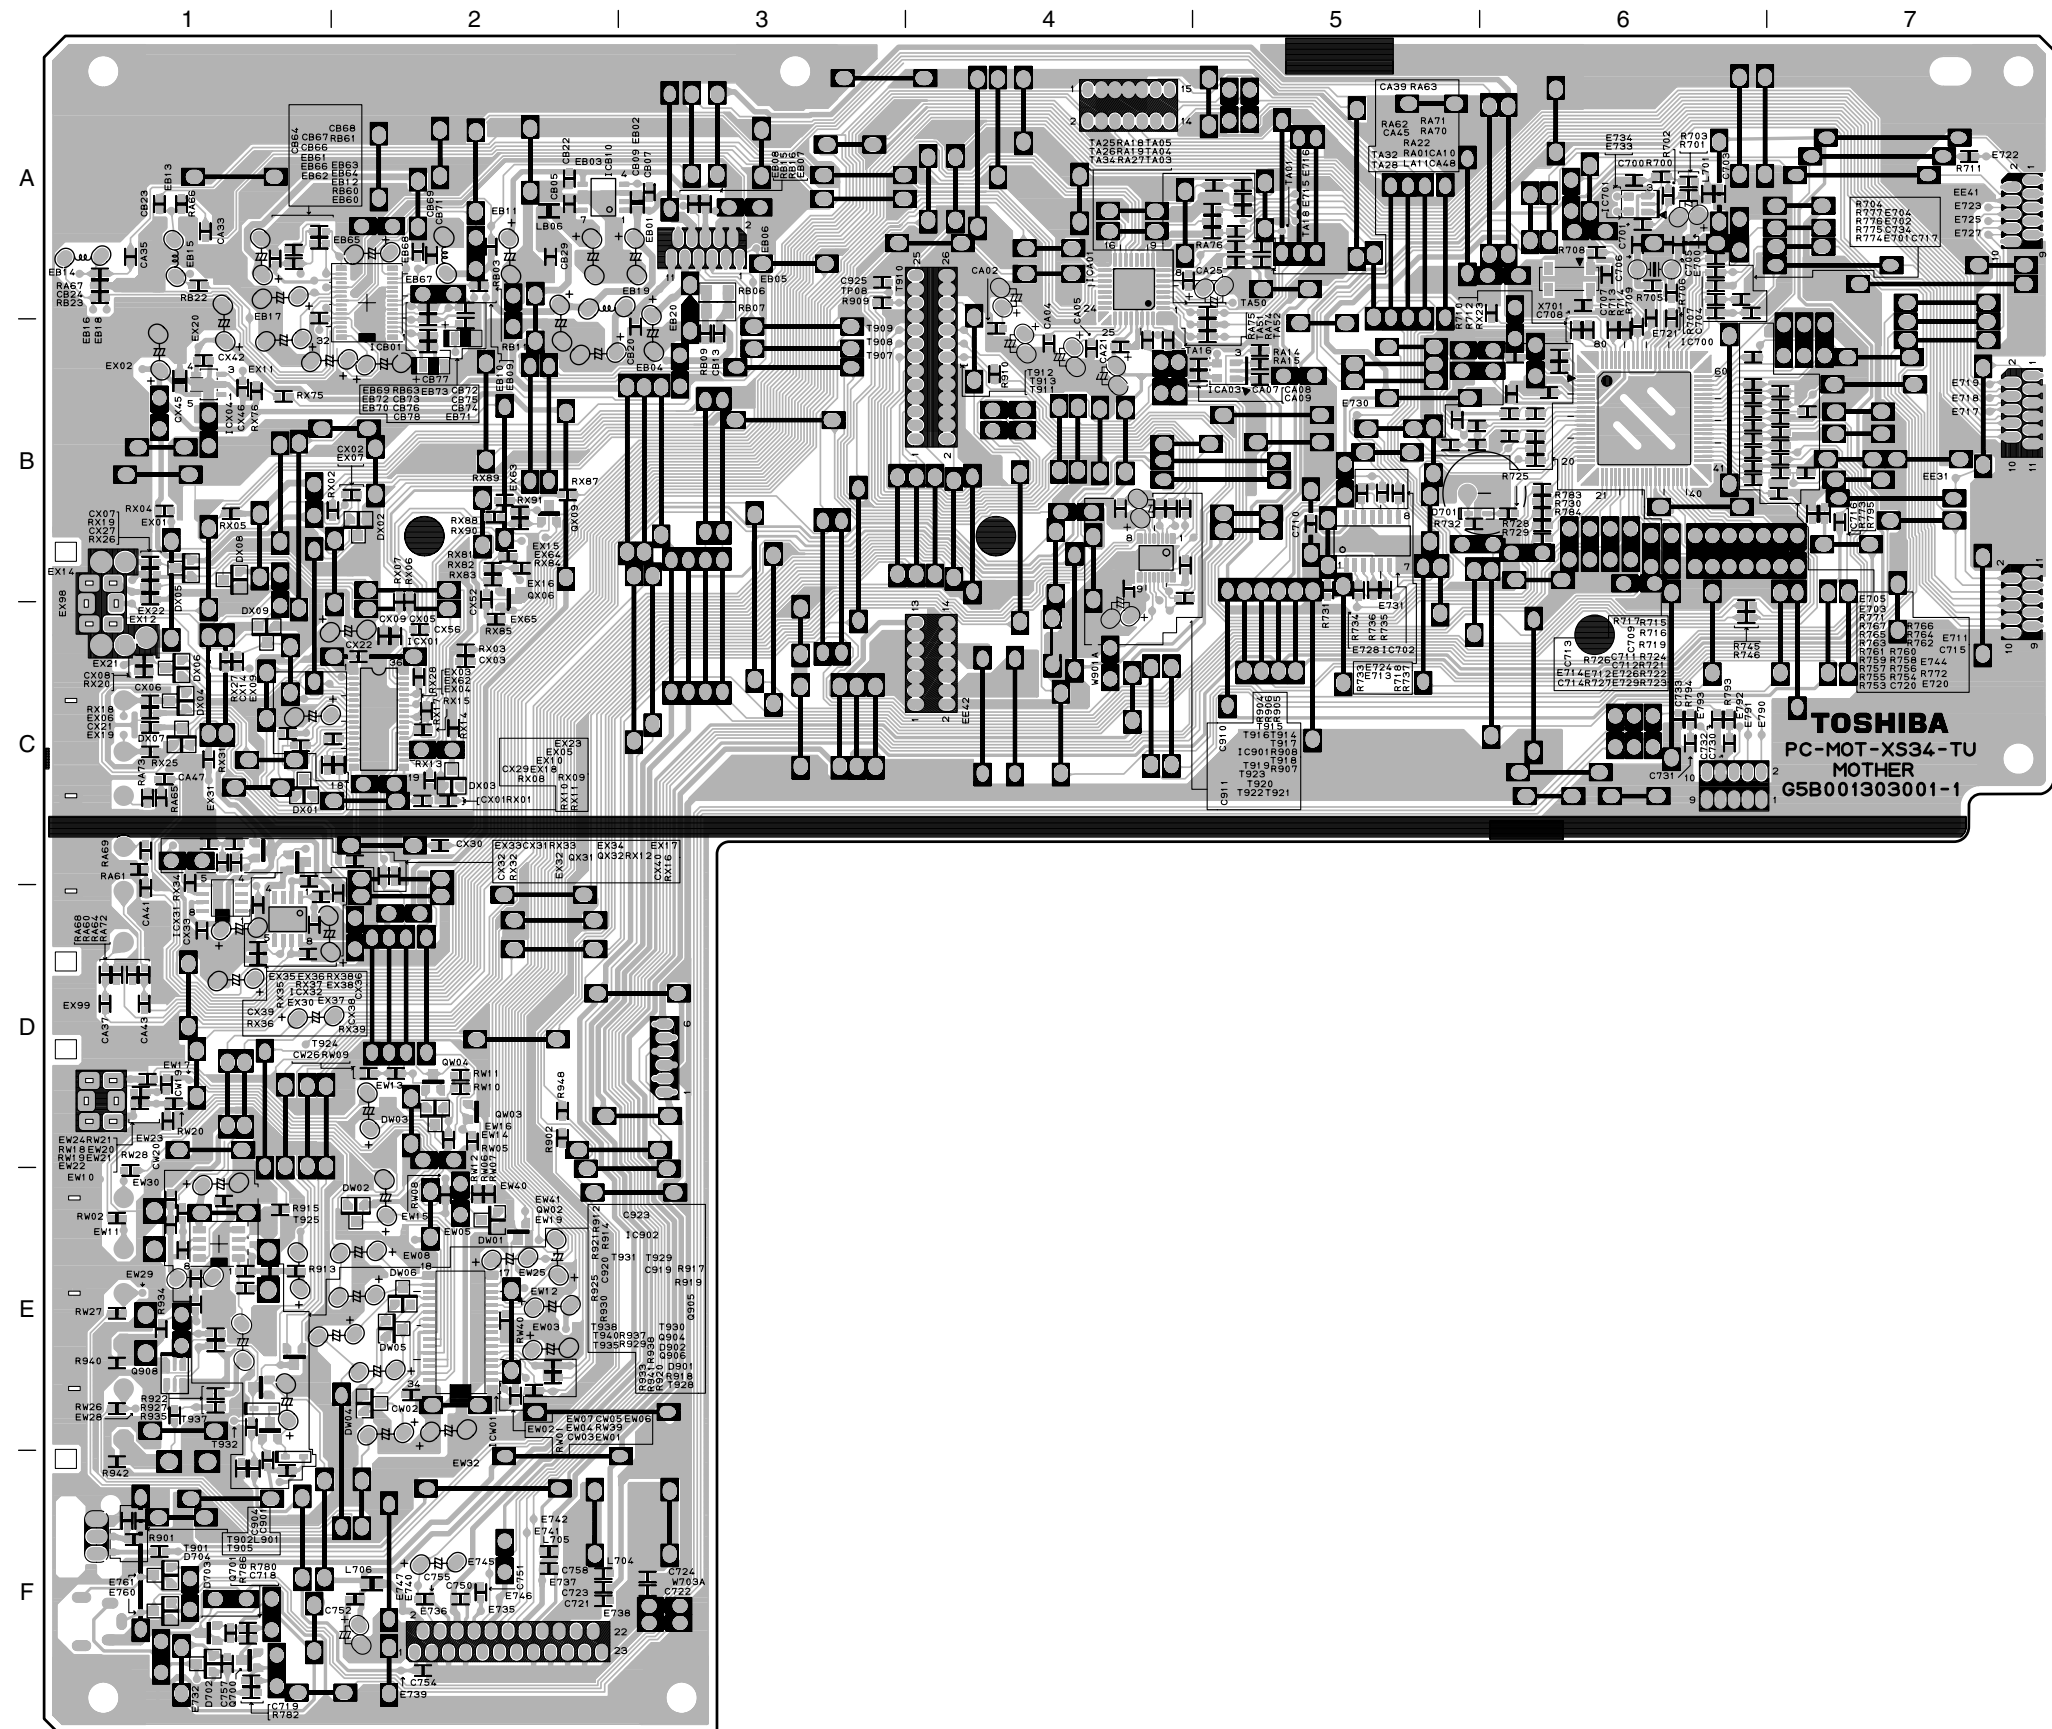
EU05 Mother PC Board (Bottom side)
